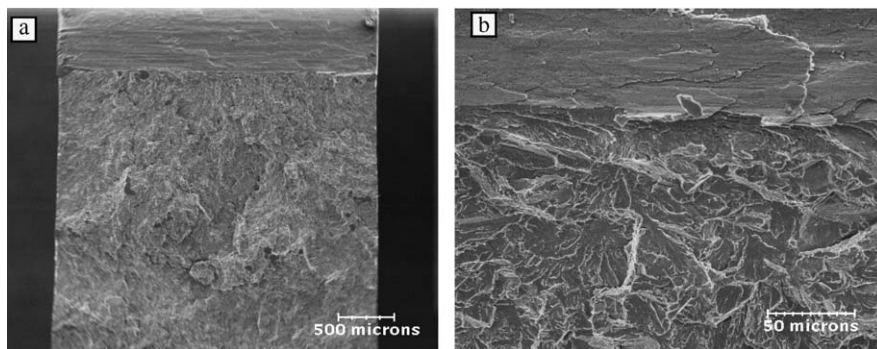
SEM micrographs showing the fracture surface of a T91 specimen following three-point bending test at -170°C : (a) general fracture appearance and (b) zoom in the failure initiation zone close to the notch root.
